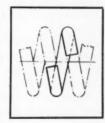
The coil of wire used in the design shown in Fig. 3 can be cut from a spring as indicated in this sketch.
